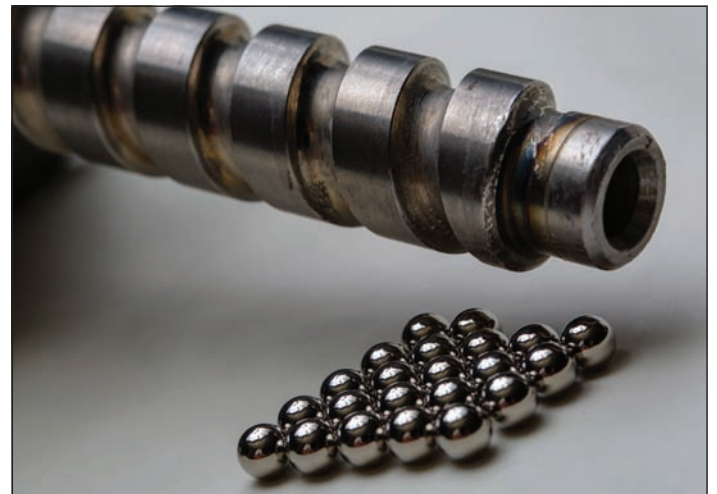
RedHead replaces the entire set of recirculating ball bearings with custom-fit bearings to eliminate slop. The standard steering gear, part #2879 (shown here), utilizes 22 bearings. The 46-pound "Mopar Upgrade", part #2879U, utilizes 27 bearings.
